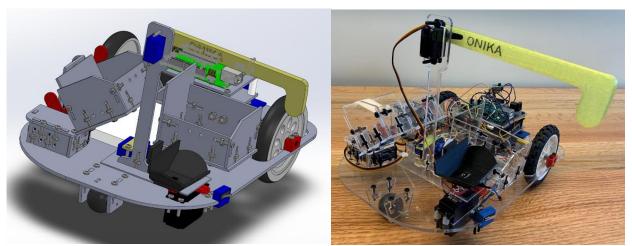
Front Left View of SolidWorks Model and Photograph of Milestone 5 Robot
